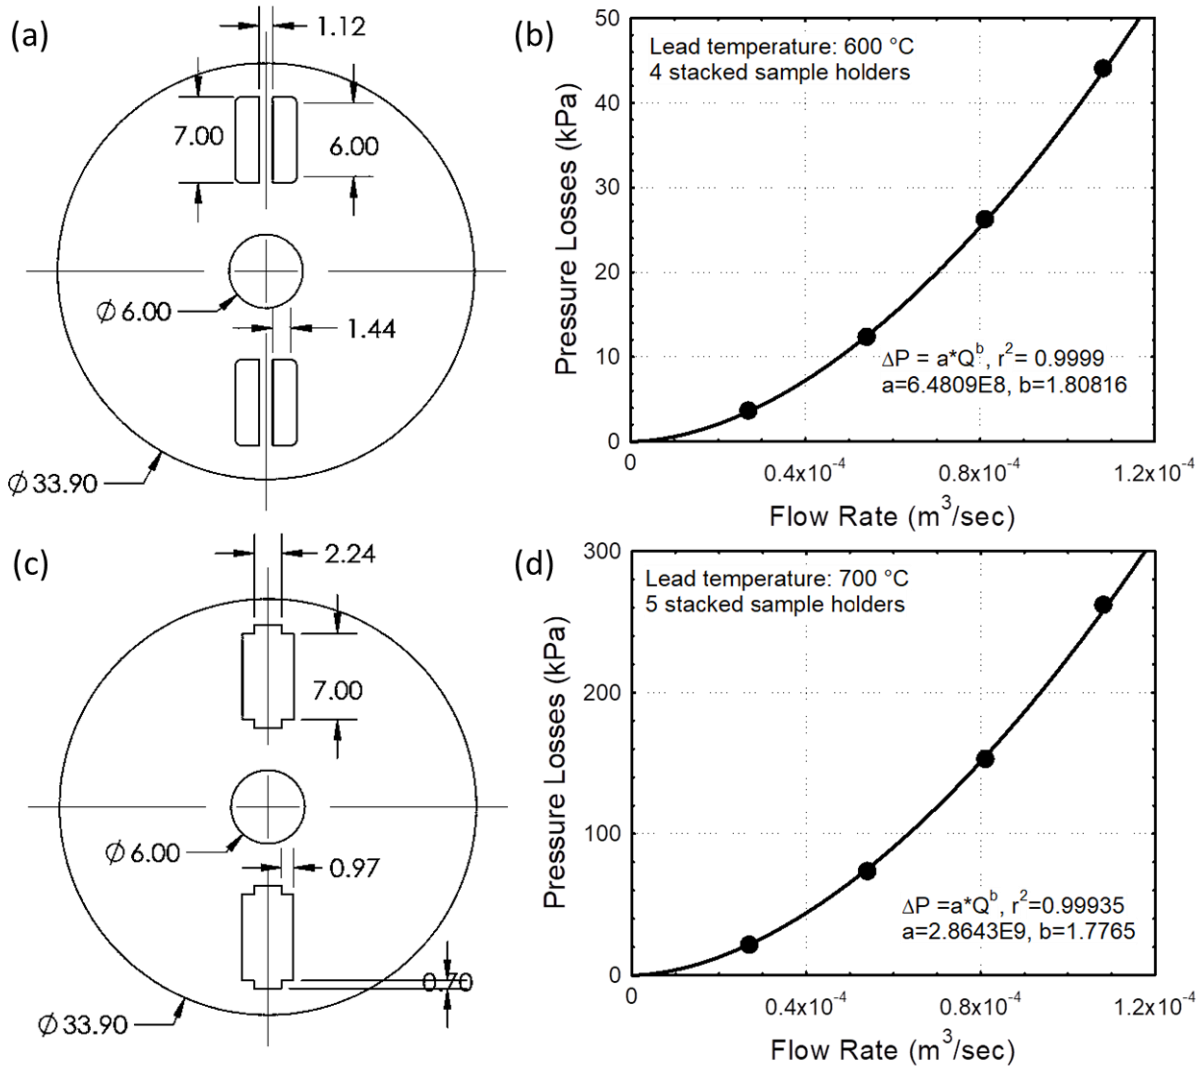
Specimen holder and accessory designs for testing at high temperatures: (a) inlet and outlet cap for modifying the multi-material specimen holder to increase velocity ratio between main pipe and specimen holder at 600°C with dimensions in mm, (b) performance of four stacked specimen holders as a function of flow rate assuming molten lead flow at 600°C , (c) specimen holder for 700°C testing with wider specimen slots to accommodate 4 specimens
